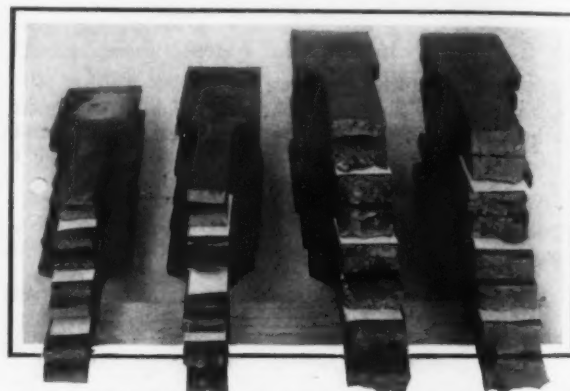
Welded Tensile Specimen After Rupture, 3.50 Per Cent Nickel Steel
